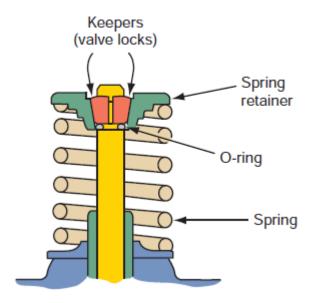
Valve assembly with spring, retainer, seals, and keepers.
